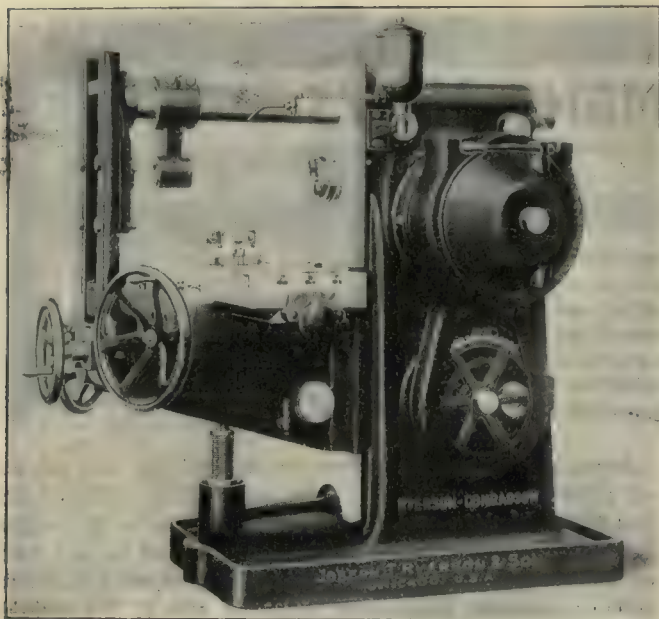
BELT DRIVE SIDE OF RYERSON-CONRADSON NO. 3 PLAIN MILLING MACHINE
